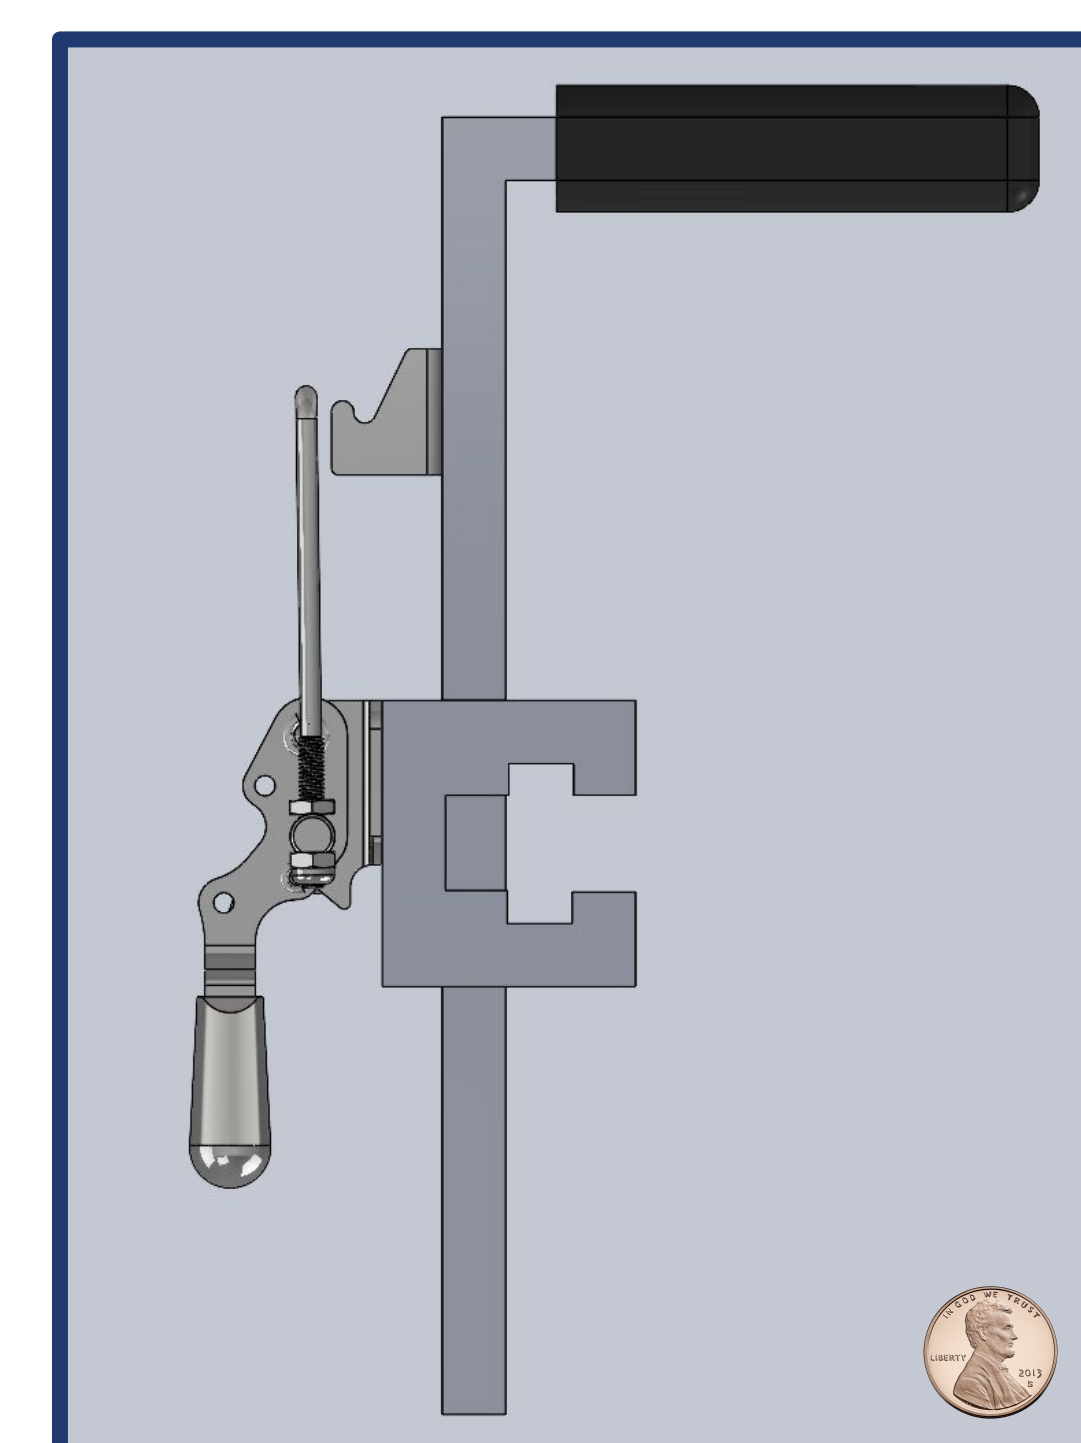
A side profile of the CAD model of our clamp design and a penny for reference of size.
